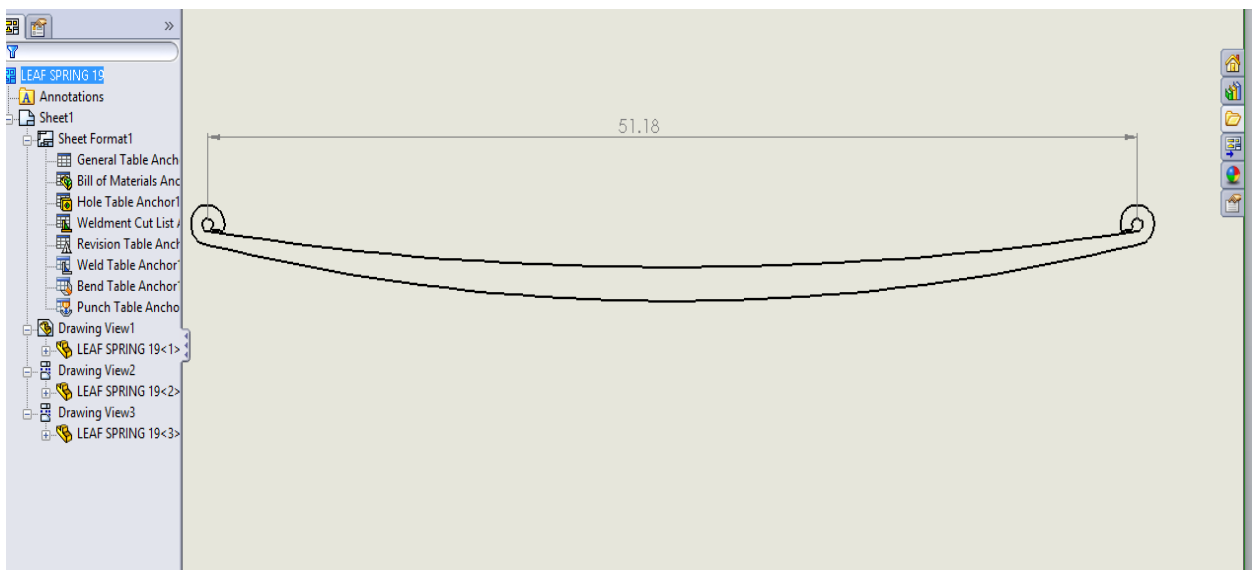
13: 2D drawing of composite materials leaf spring using solid work
